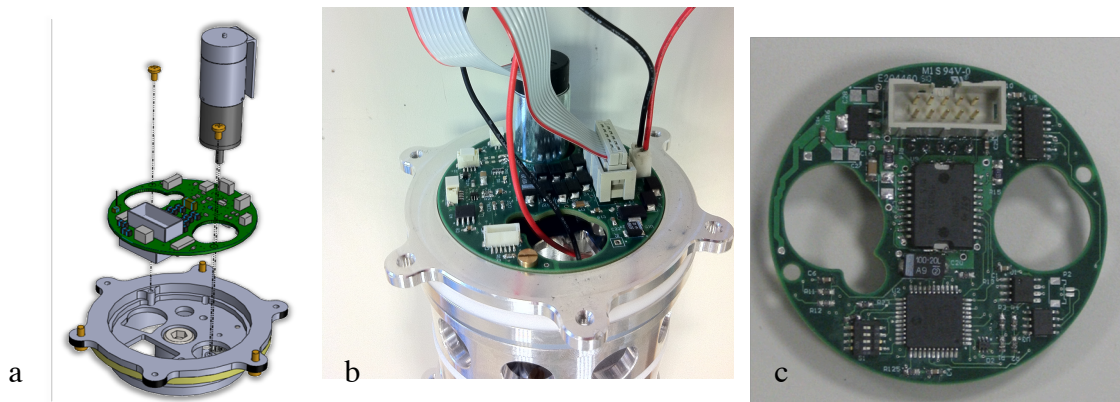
a) Controller assembly in a groove at the back of the base b) physical model c) PWB layout.
